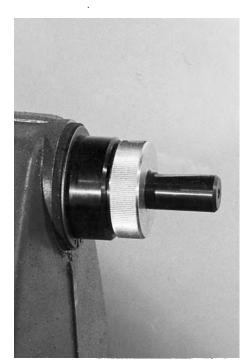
The Mark V main and auxiliary spindles have a reverse taper. The locking setscrew of all spindlemounted accessories must seat securely against the flat.
